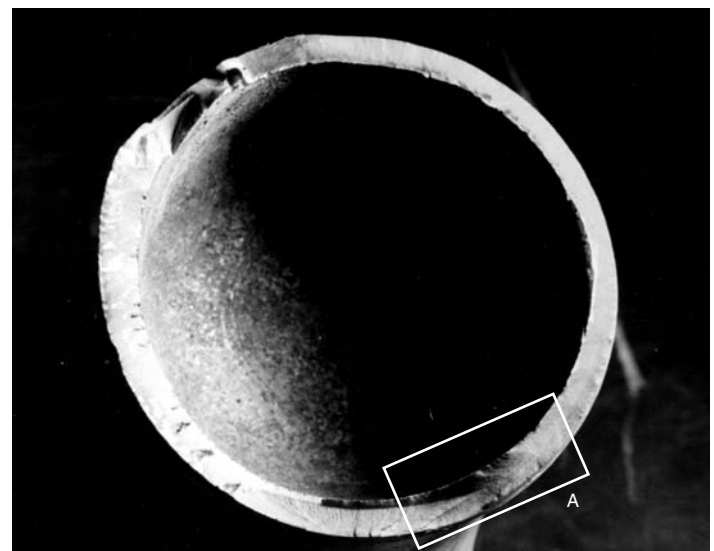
Fracture surface of the failed starboard strut
